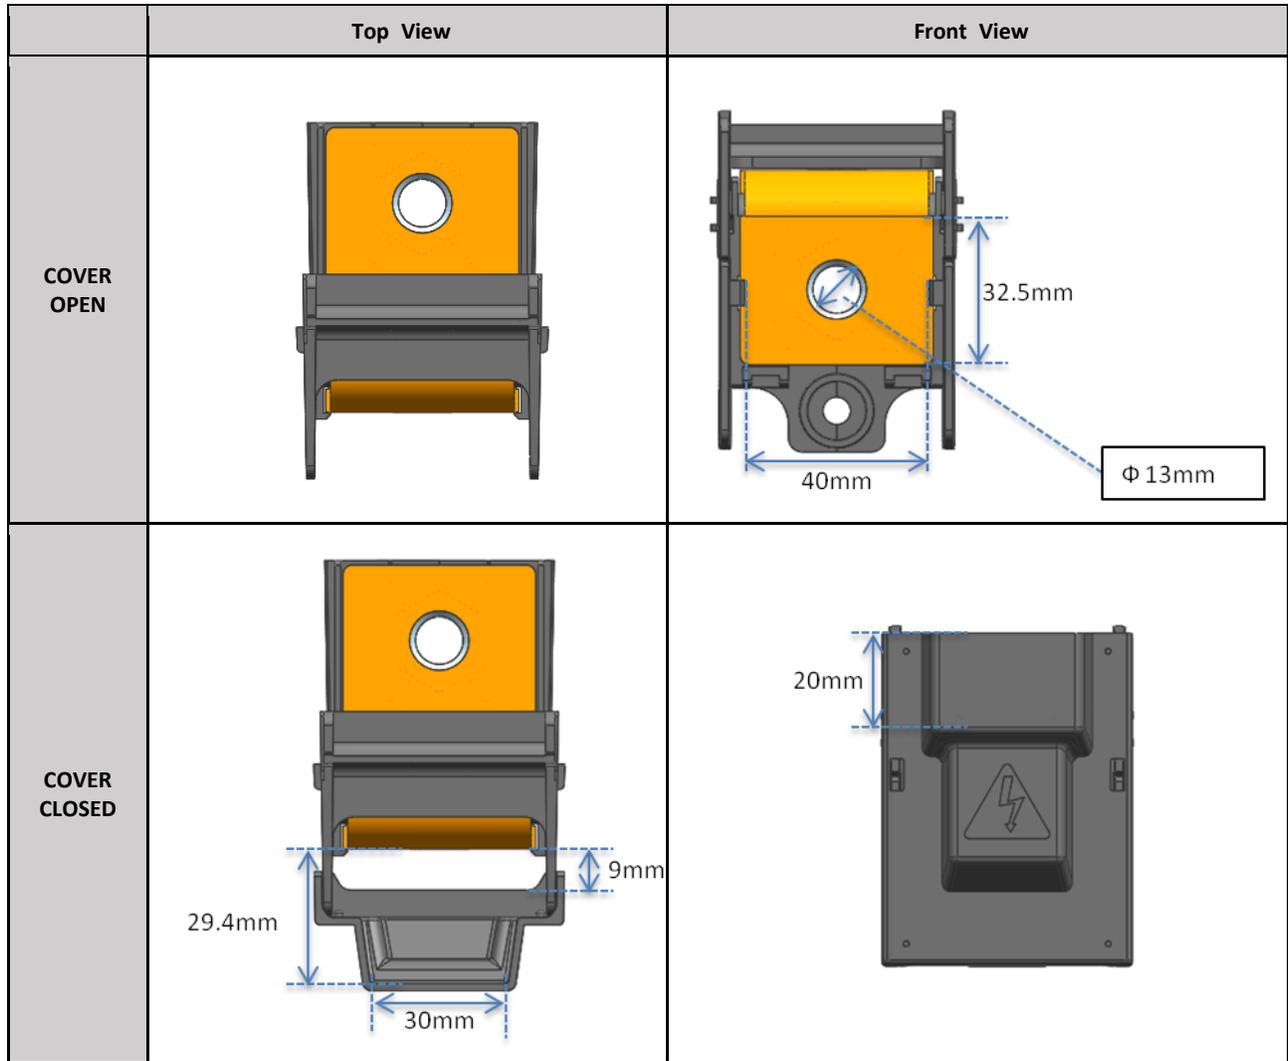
Terminal Block Front / Top View (Cover Opened/Closed)
